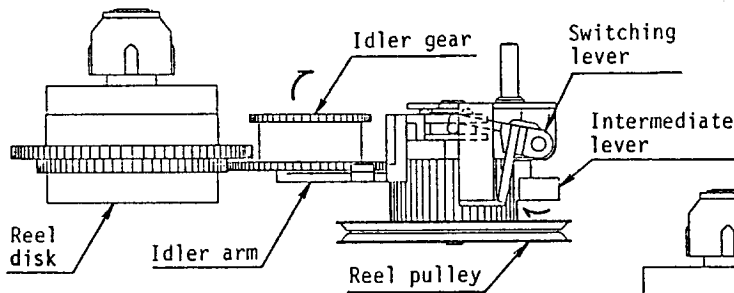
Gear Engagement in Fast Forward and Rewind Operations
